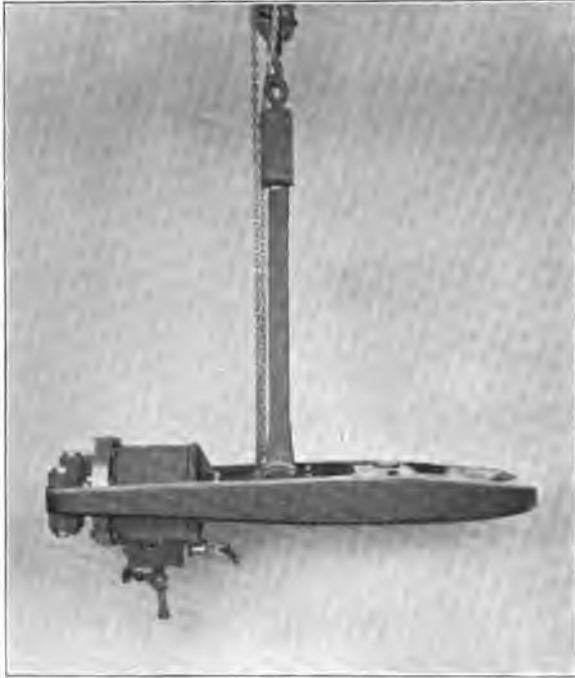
ANOTHER ARRANGEMENT OF THE ALLEN RIVETER.
